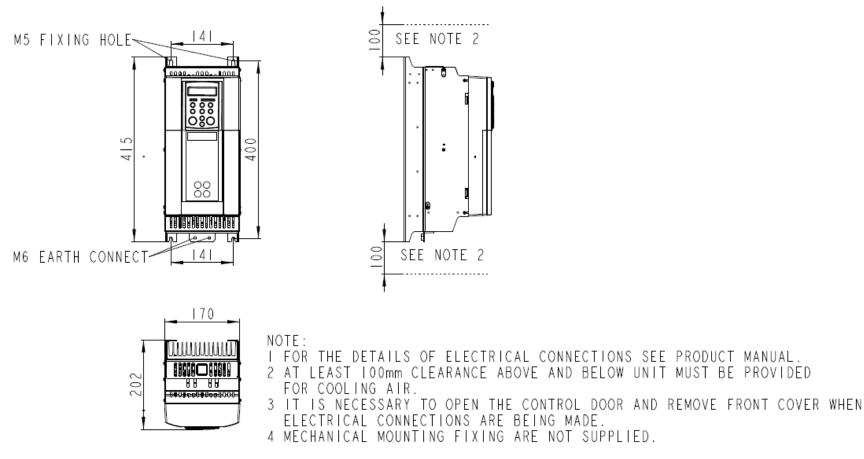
Frame 1: 35A & 45A Stack Assembly
